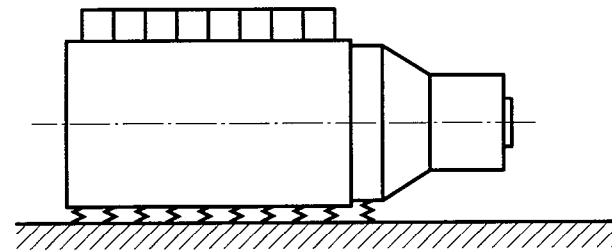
Assembly with flange housing and resilient mounting of the engine
